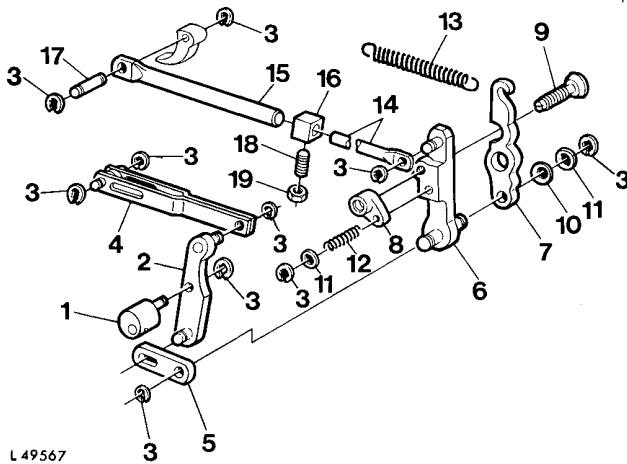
Exploded View of Rockshaft Cylinder and Valve Housing Linkage
